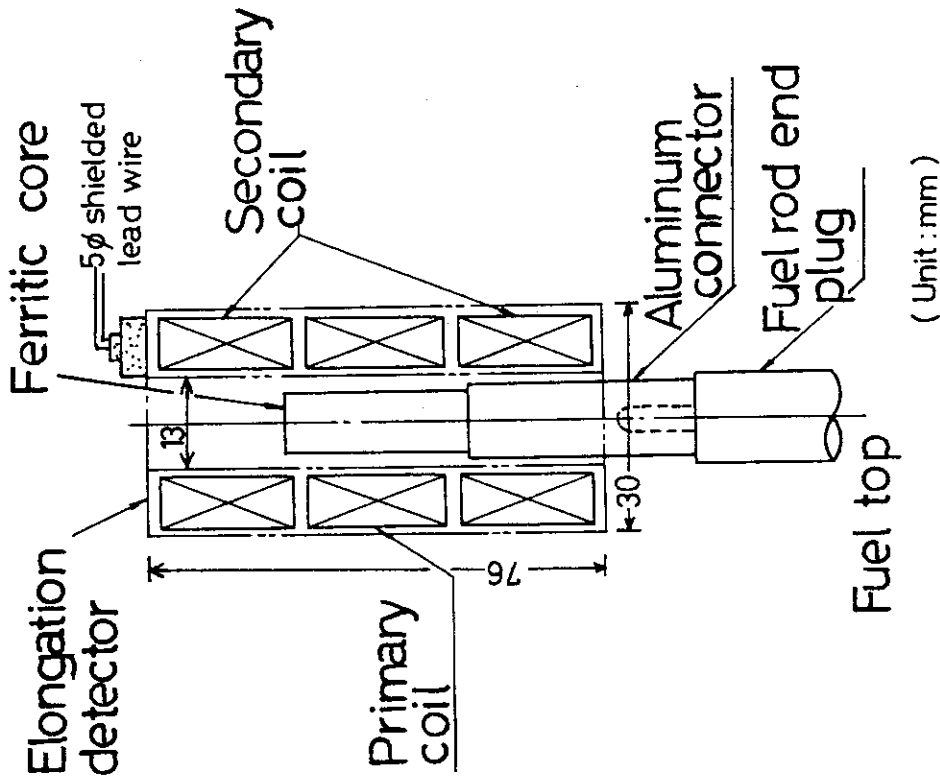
Cross section of cladding extensometer attached to the top end of fuel rod.
